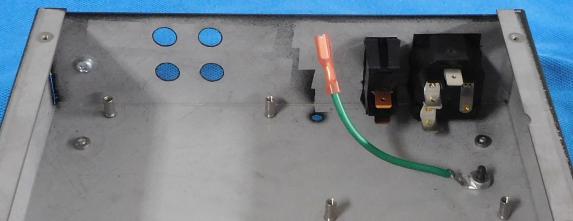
Attach ground wire to chassis with 6-32x3/8" black oxide screw and 6-32 nut
